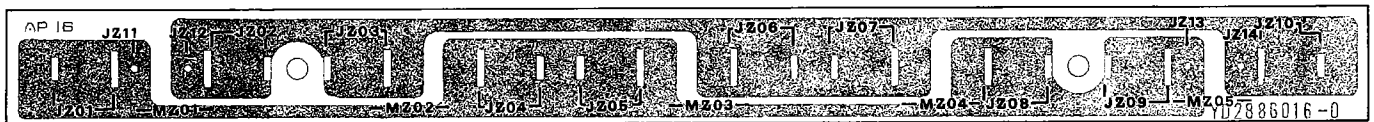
Dial Lamps Assembly PZ01 Component Locations
